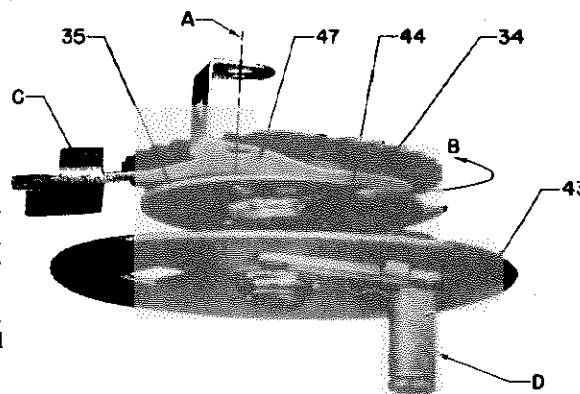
Clutch Assembly with Pawl (44) Engaged
